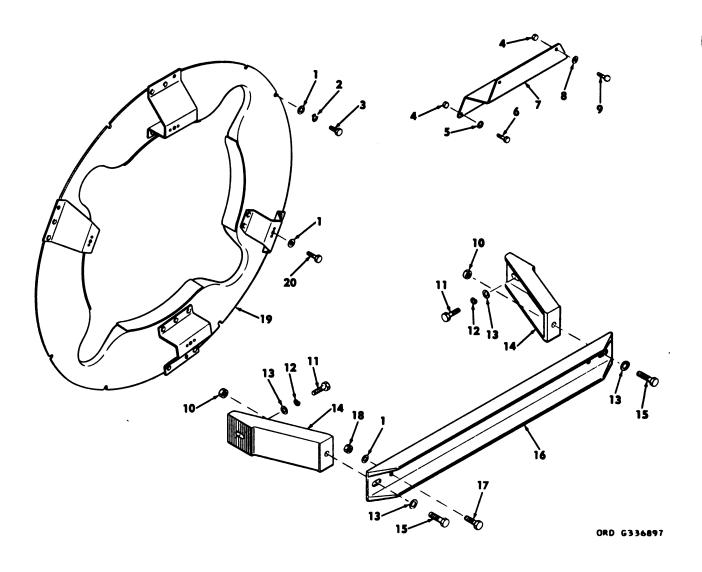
CONTAINER ASSEMBLY, BOLTED, AFT BODY /9031497/ /SEE FIGURE 126 FOR NEXT HIGHER ASSEMBLY/
